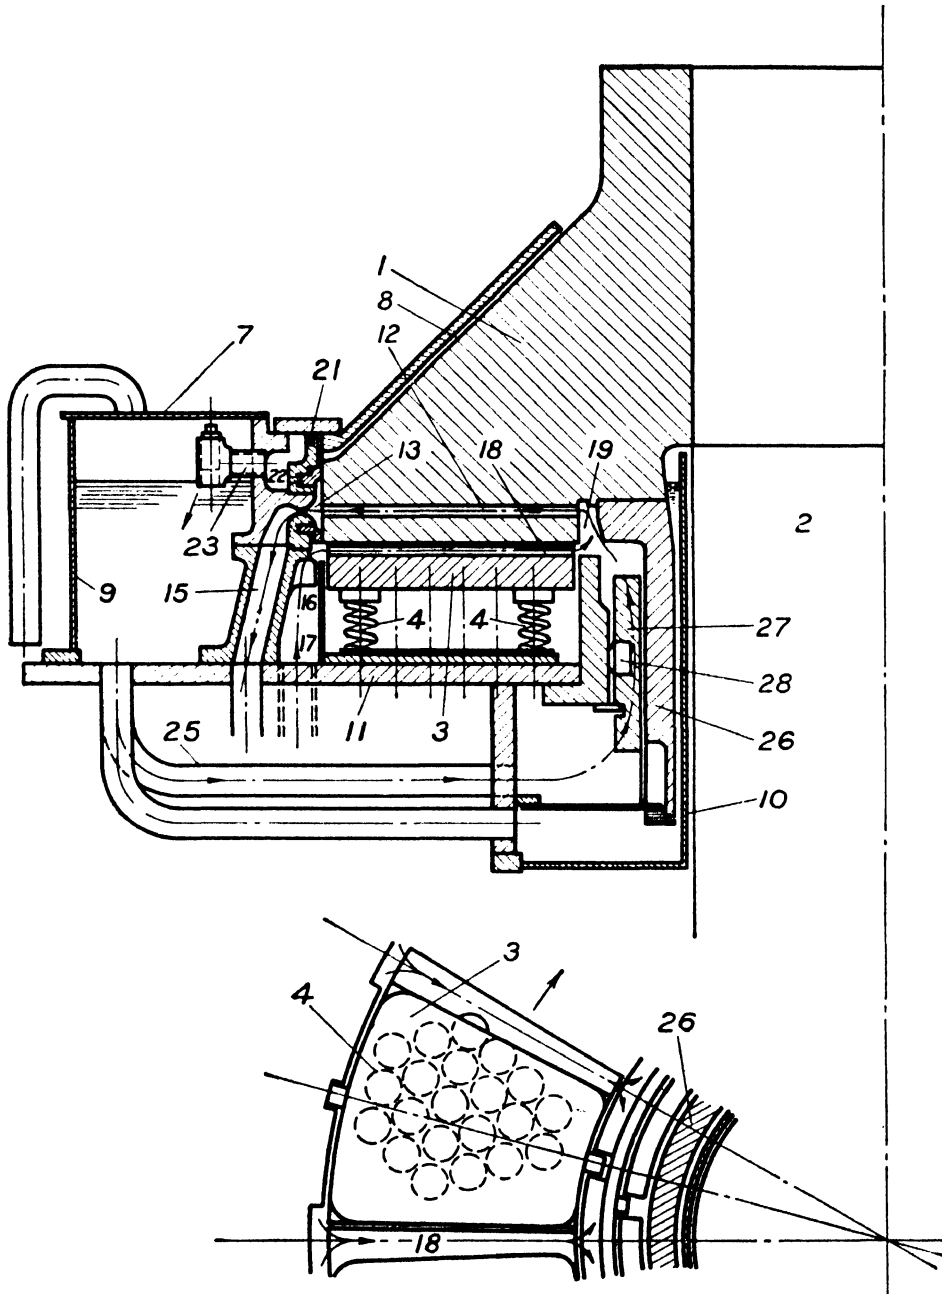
Thrust bearing for hydraulic turbine and generator, by Allmänna Svenska Elektriska, A.B., Sweden
